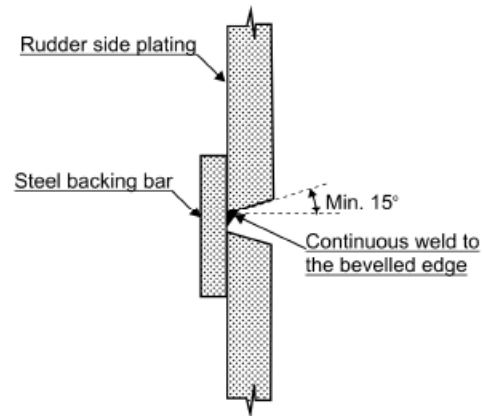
Use of steel backing bar in way of full penetration welding of rudder side plating
